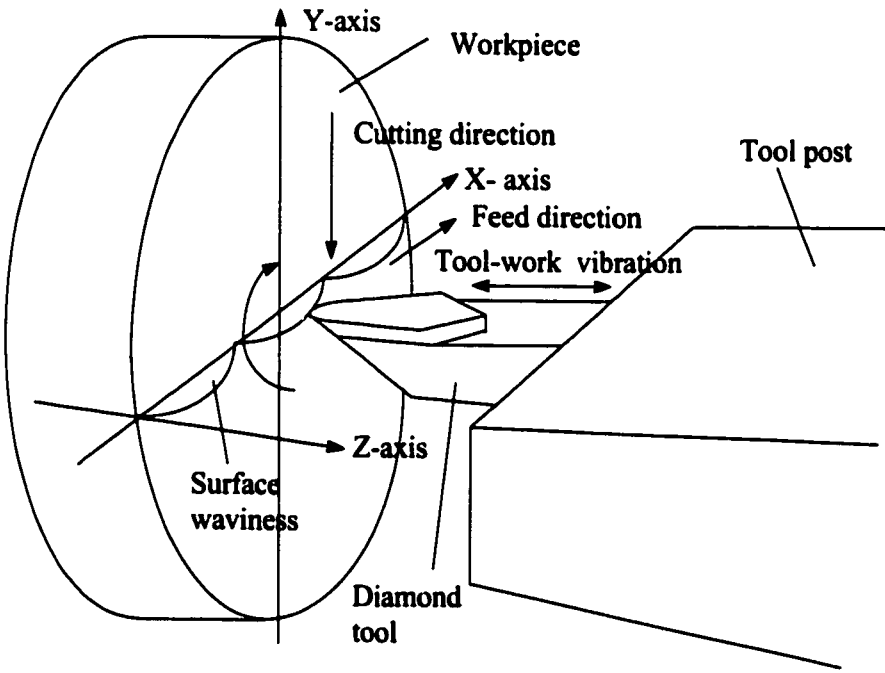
Surface waviness induced by the relative vibration between the tool and the workpiece
